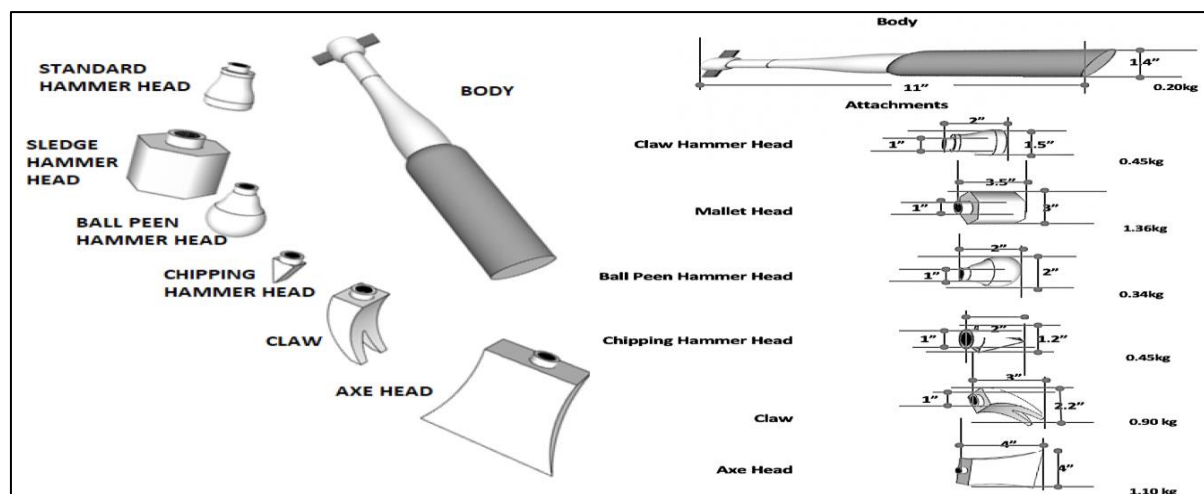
Design and Dimension of Multi-Purpose Hand Tool
